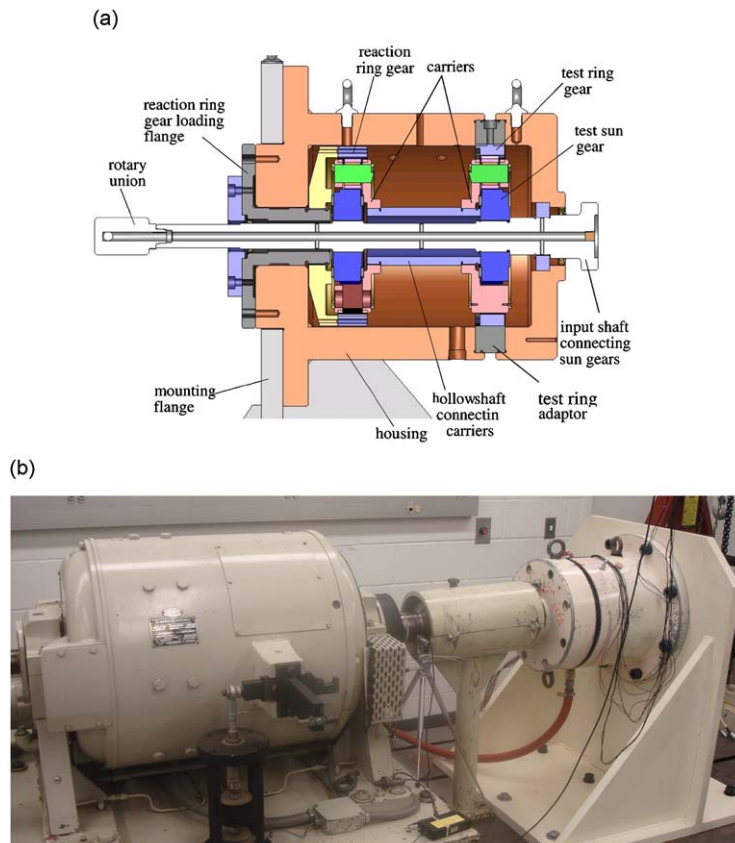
(a) Cross-section of the back-to-back planetary test fixtures and (b) a view of the test set-up on a transmission dynamometer.
